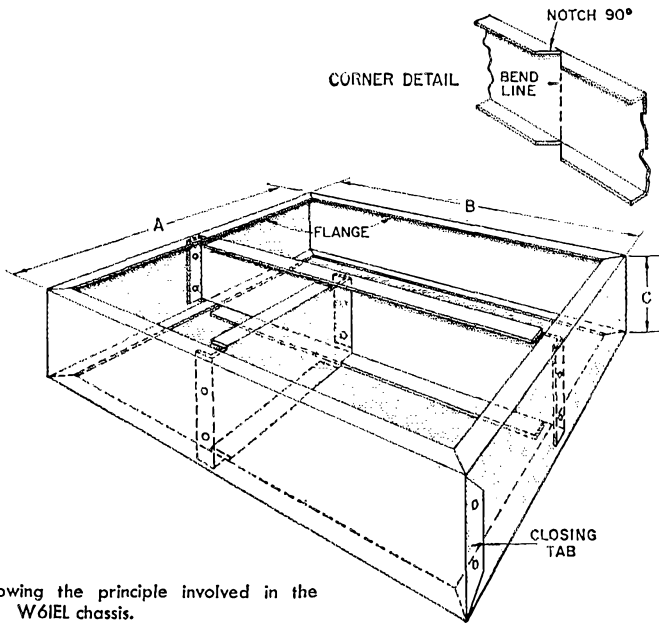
Sketch showing the principle involved in the W6IEL chassis.
